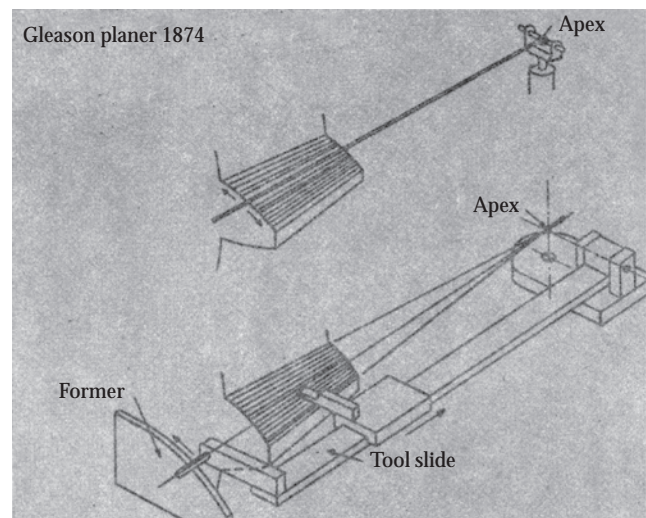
Principle of Gleason bevel gear planing machine. (Courtesy of Gleason Works, Rochester, New York.)
